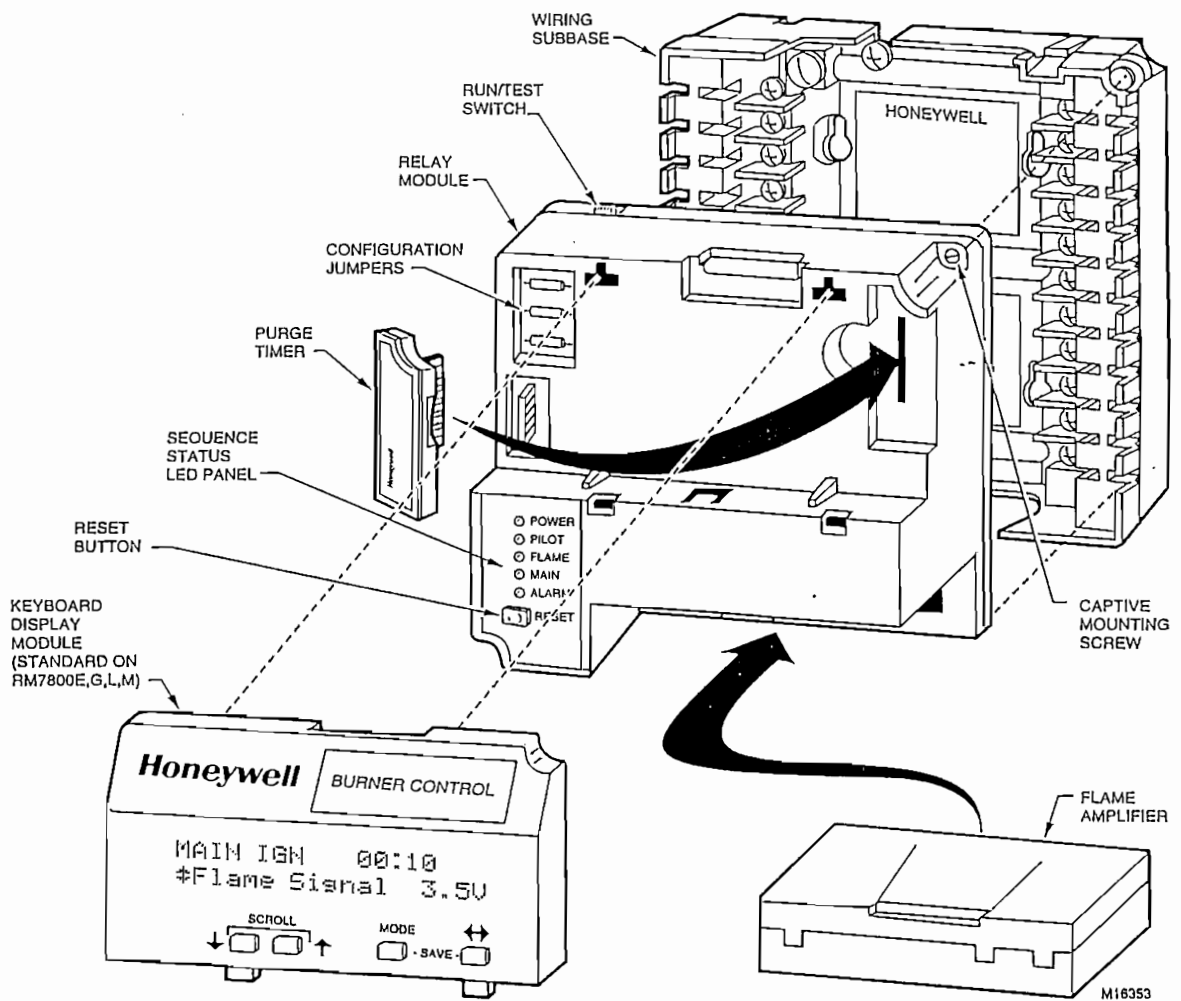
RM7800/RM7840 Relay Module exploded view.
